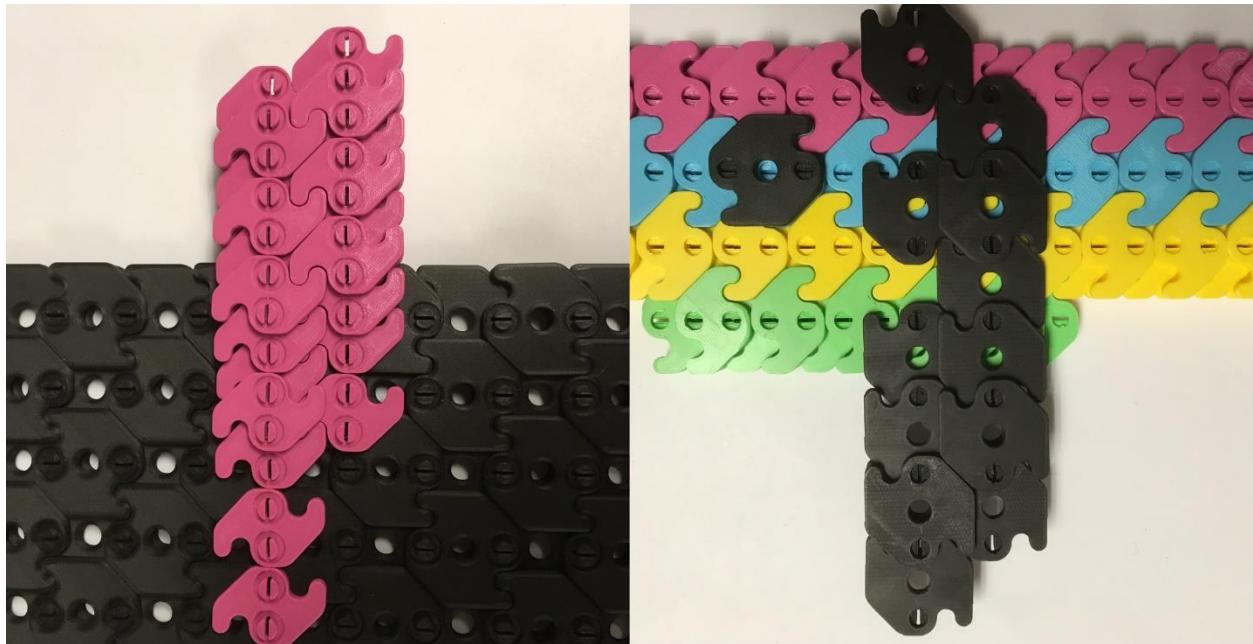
Combination of orthogonal staple parts and double-sided parts, the original tooth geometry.
